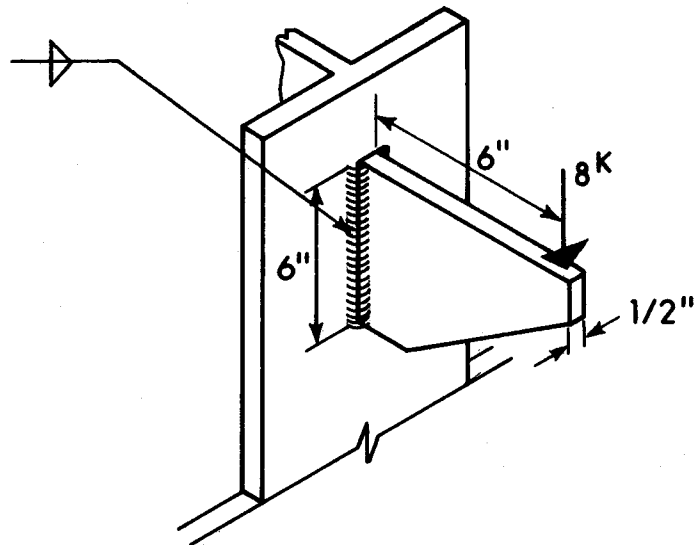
WELDED SUPPORT BRACKET
